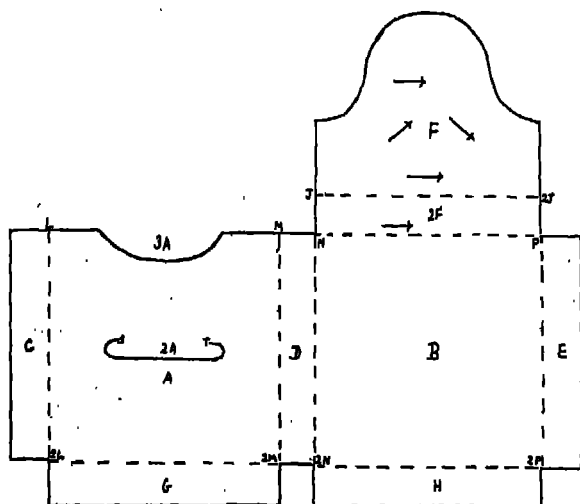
SINGLE-PIECE POPULAR PRICED POCKET MATCH BOX.
